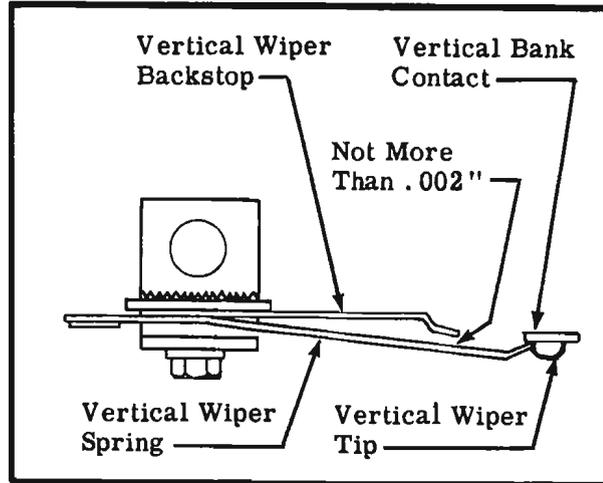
Above is a Side View of the Vertical Wiper and Backstop Requirements.
